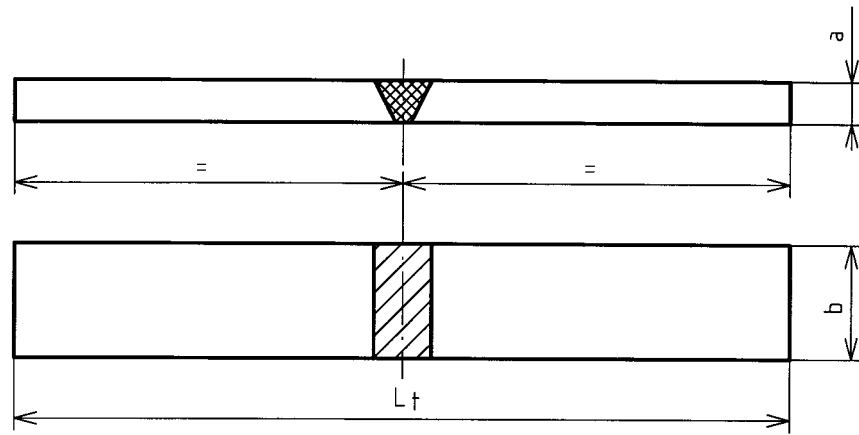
Transverse root and face bend test specimen of a butt weld (RBB and FBB)
